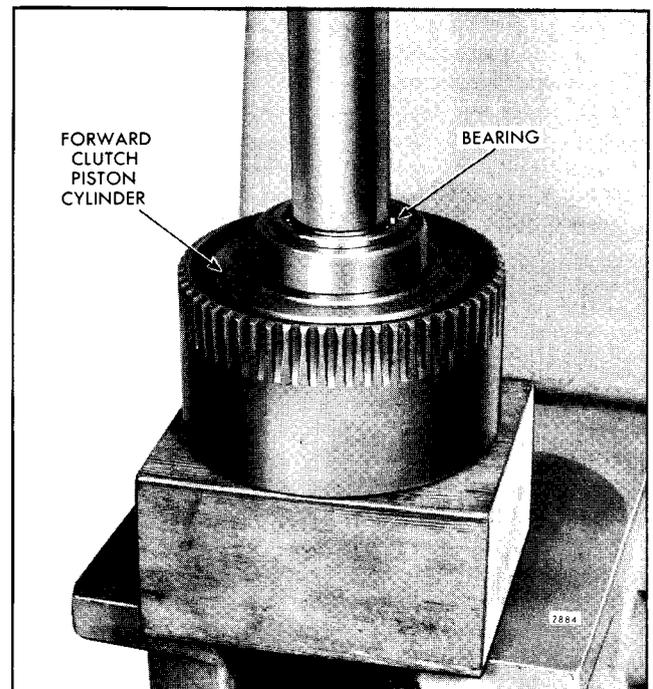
Installing Gear Shaft Bearing in Forward Clutch Piston Cylinder
